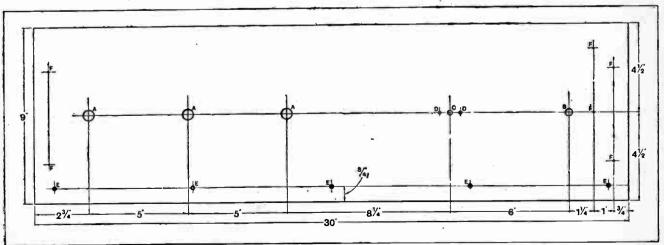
Drilling details of the front panel. A, 9/16in. diam.; B, 3/8in. diam.; C, 1/4in. diam.; D, 5/32in. diam.; E, 1/8in. diam., countersuak for No. 4 wood screw; F, 3/32in. diam., drilled from back of panel and tapped 6 B.A. (these are blind holes and not carried through panel).
